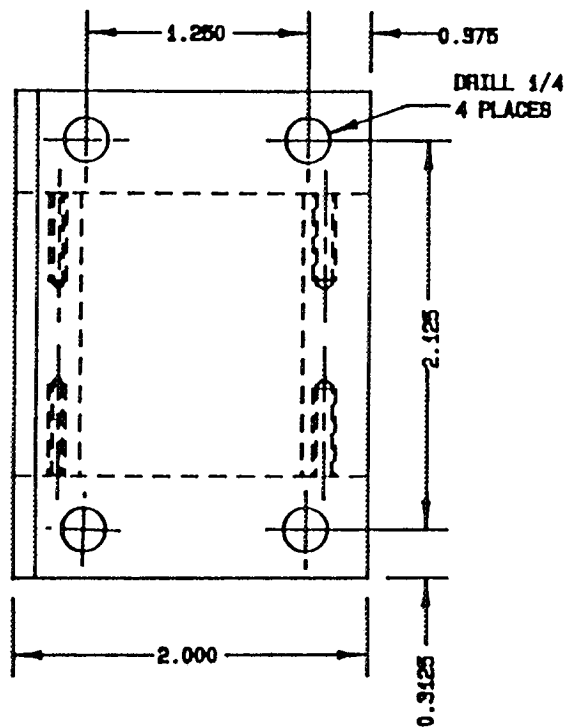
Iosipescu Shear Test Fixture Alignment Tool Assembly and Clamp Assembly.
